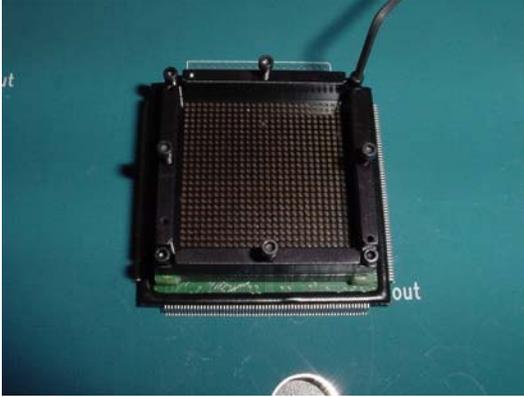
Assembly step 2 – tighten top frame with 0.5" wrench
